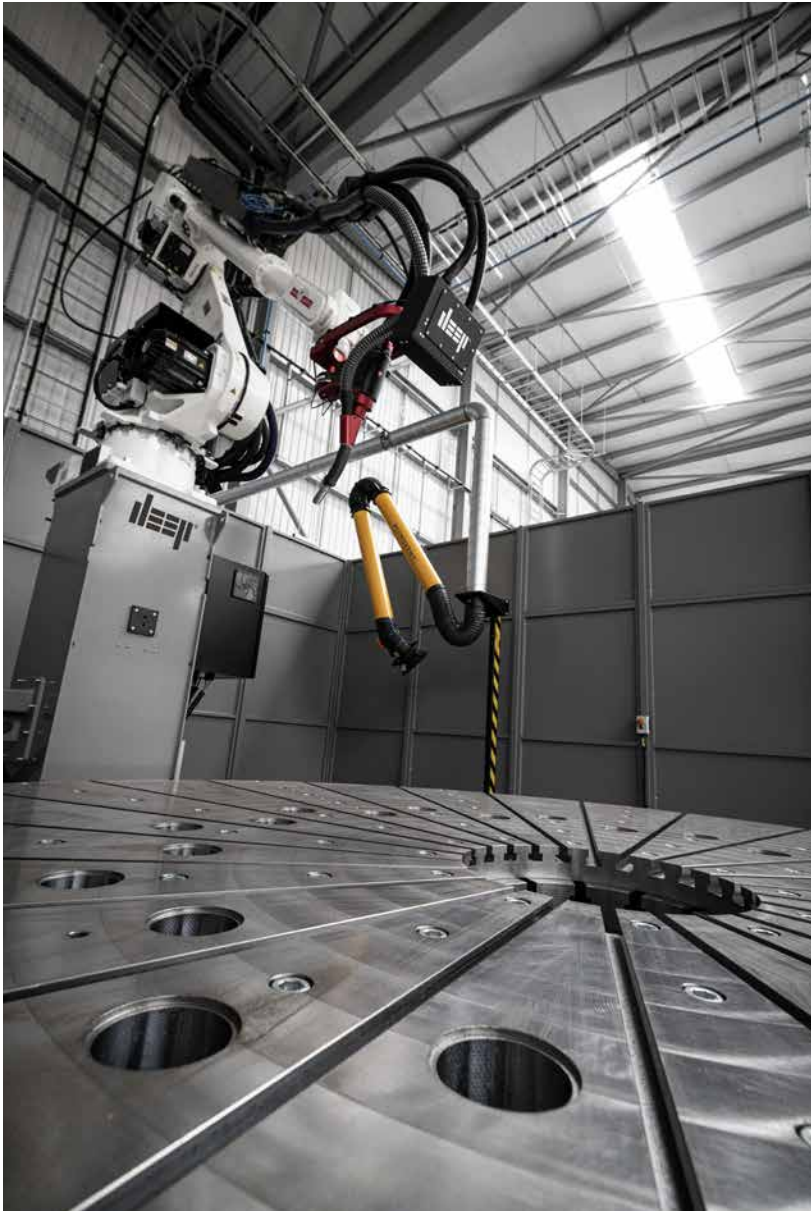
A large single-axis manipulator table paired with a static robotic wire-arc DED system, an approach that enables DEEP Manufacturing to produce large pressure-vessel sections while maintaining consistent deposition conditions (Courtesy DEEP Manufacturing)
